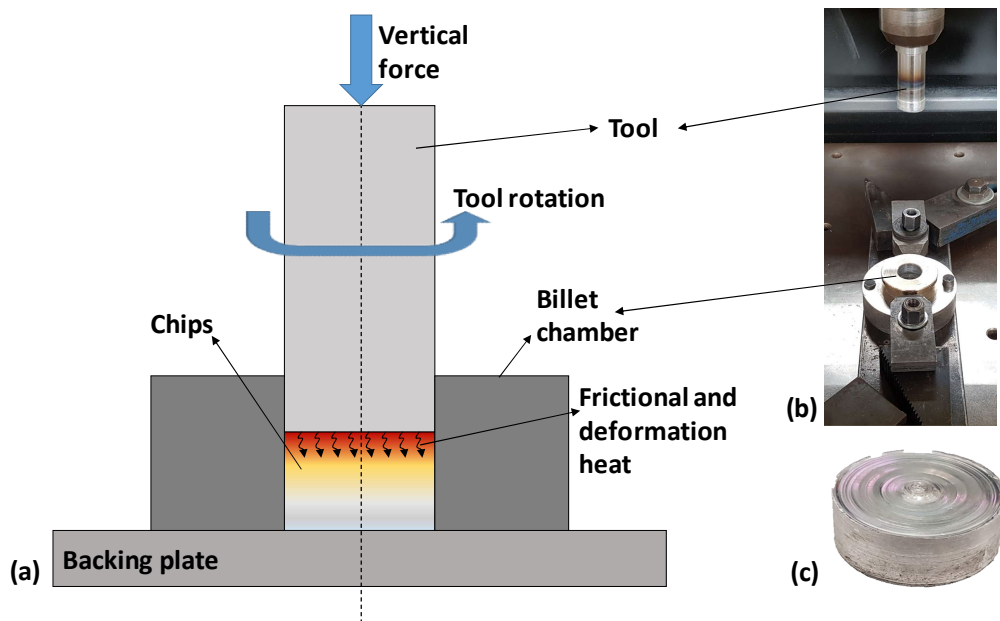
(a) sketch of the process, (b) utilized fixture and (c) consolidated billet
